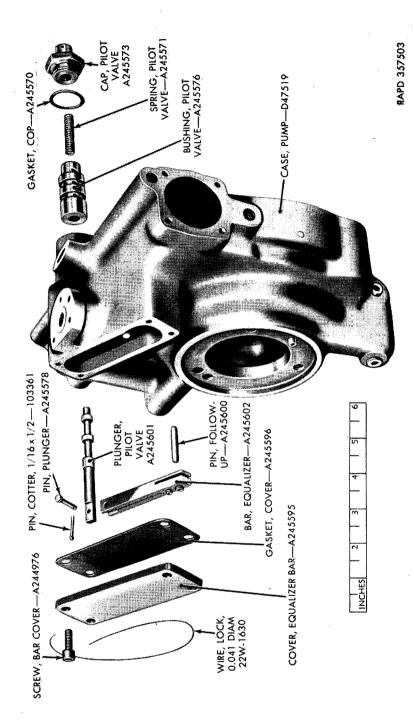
Hydraulic pump equalizer bar and pilot valve plunger, exploded view.
